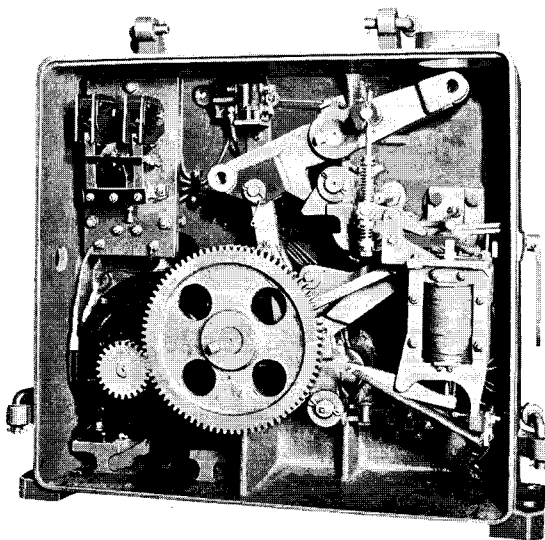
Motor Operating Mechanism for an Oil Circuit-Breaker (20)
